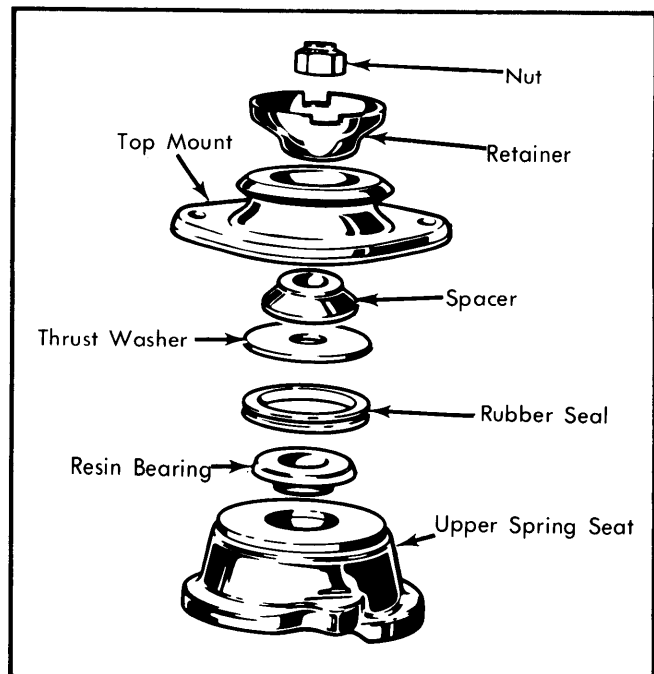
Exploded View of Top Mount Components for Fiesta Strut Assembly
